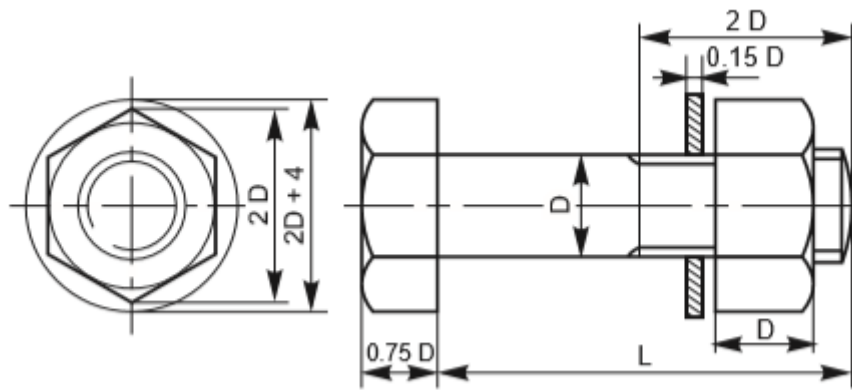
A hexagonal headed bolt with a nut and a washer in position
